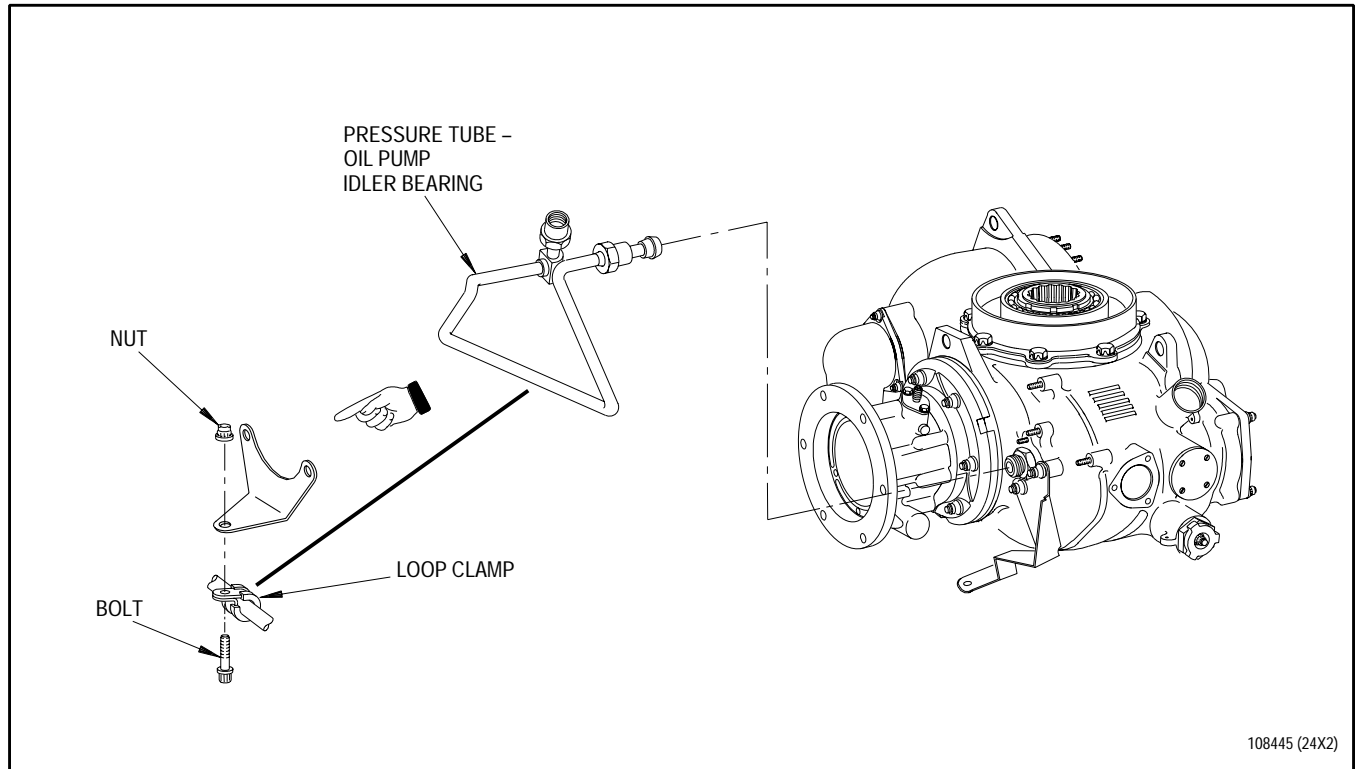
Main Oil Pump Idler Bearing Pressure Tube - Removal
